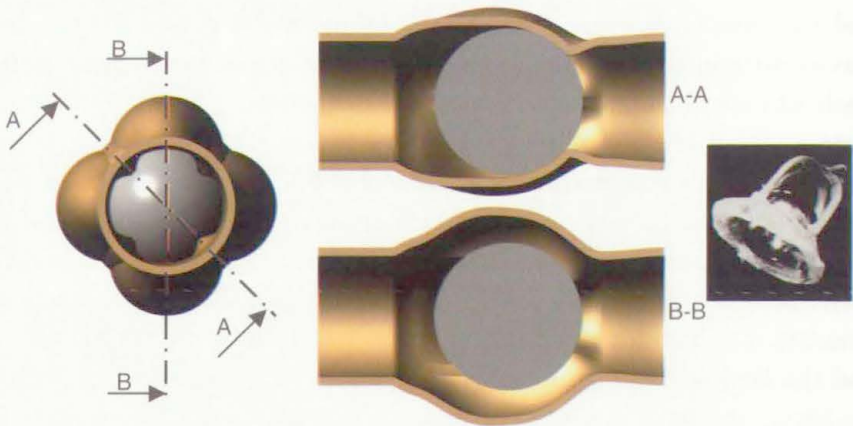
CAD view of a ball valve. Struts and stoppers are integrated into the housing.
